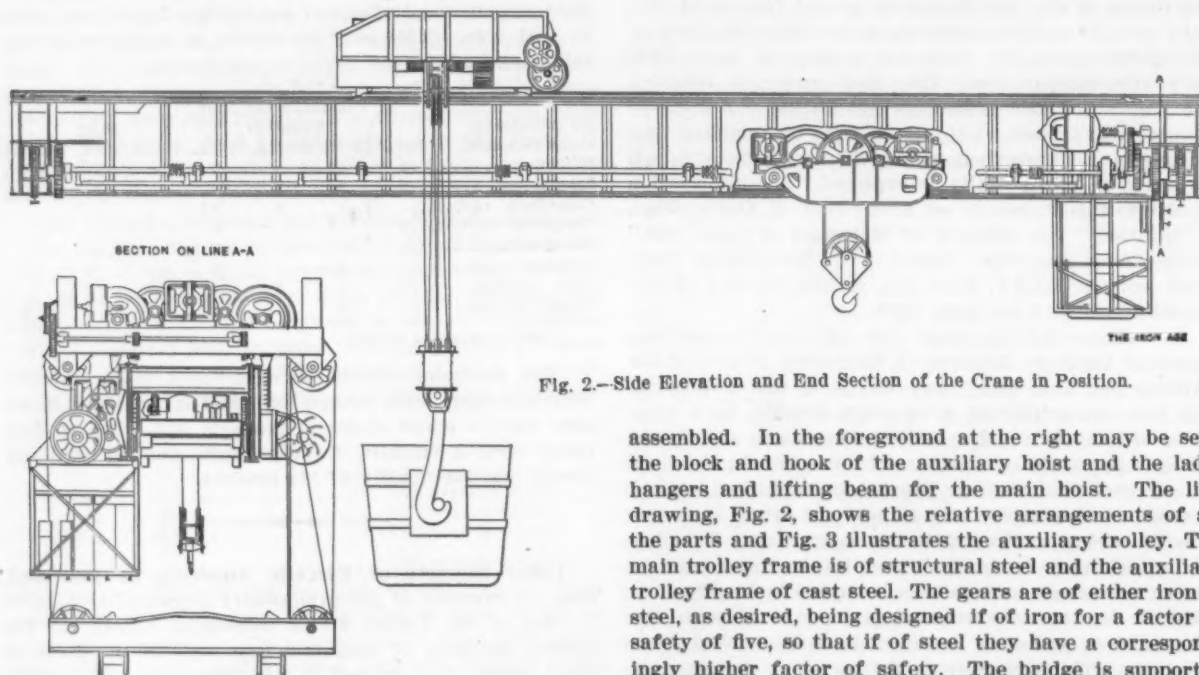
Side Elevation and End Section of the Crane in Position.
